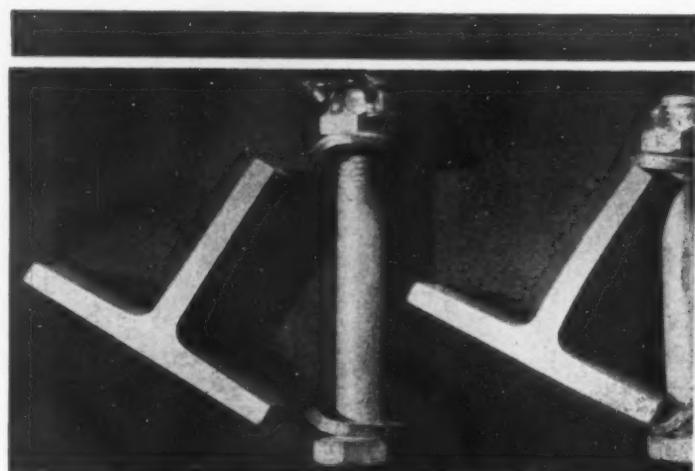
Bolt, nut, and washers are used to stress test samples, shown here uncoated.
